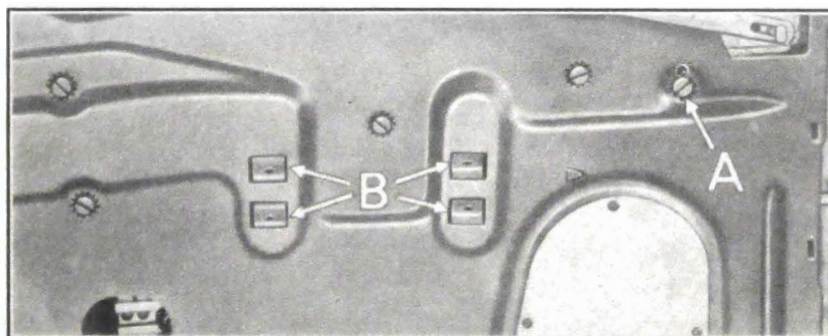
How window regulator cam at "A" may be adjusted, also the door arm rest at "B"
